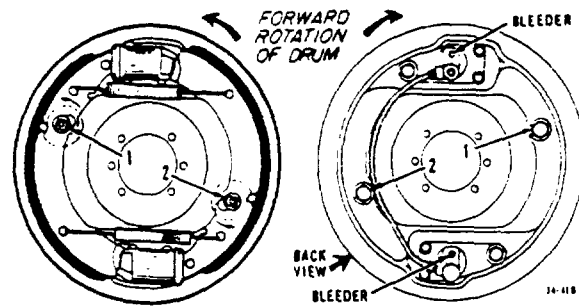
Outboard and Inboard Views of Left Front "F" Brake
